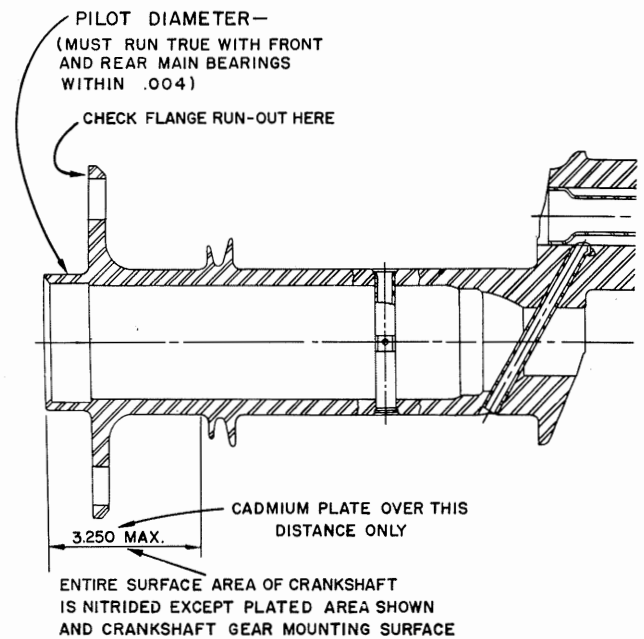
View Showing Un-nitrided Surface of Crankshaft
